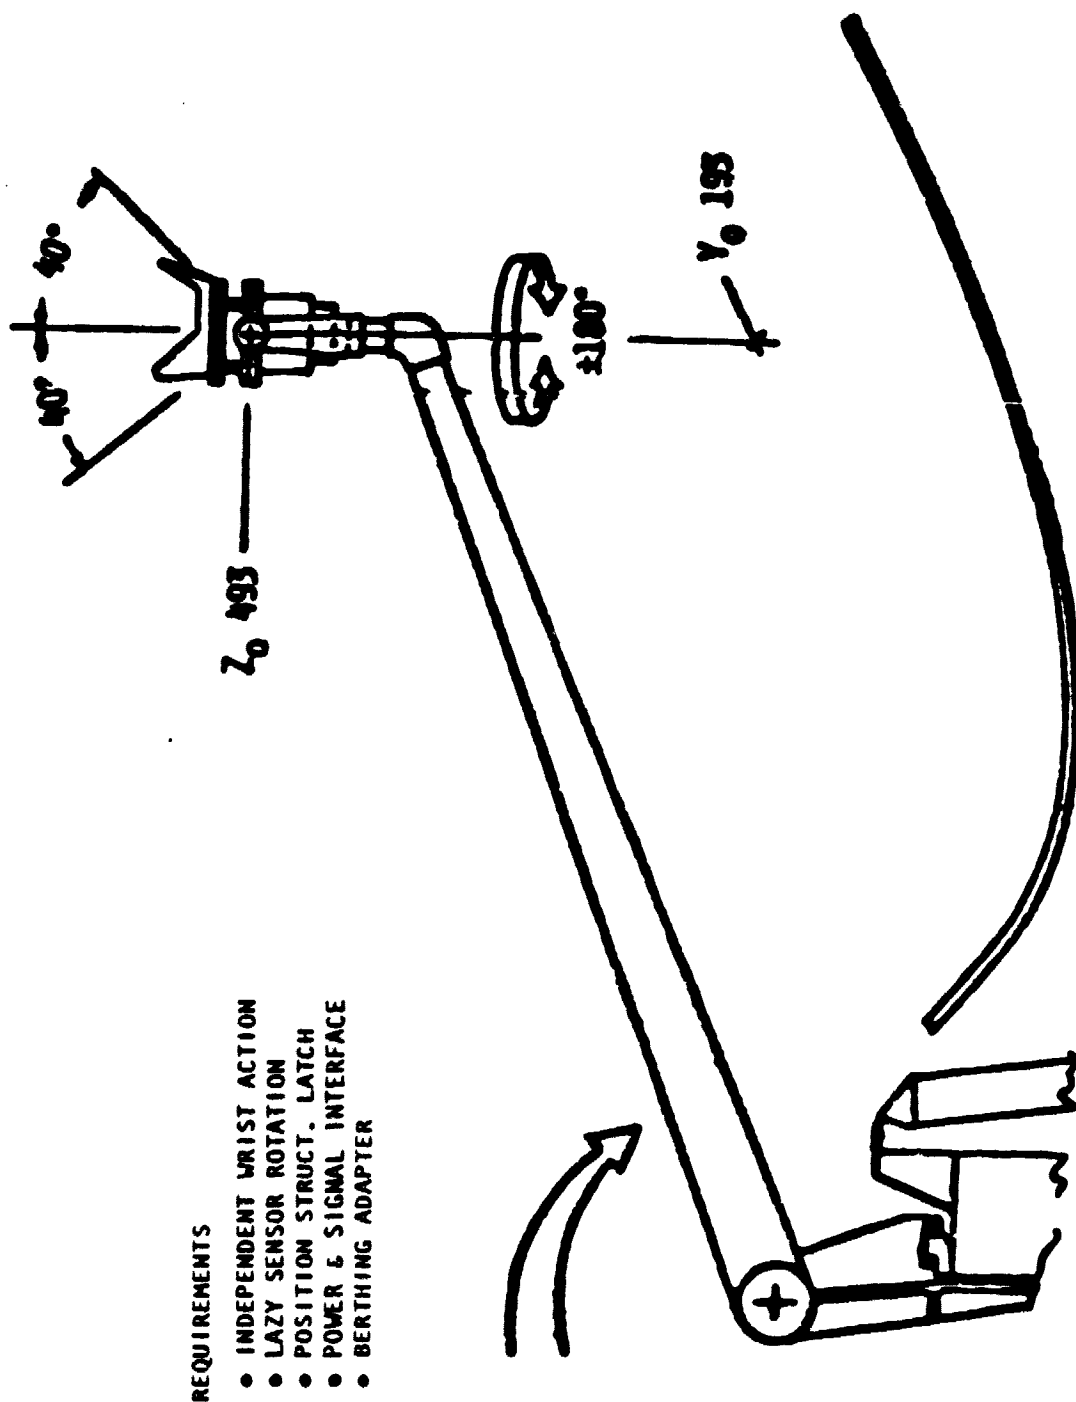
Holding and Positioning Aid -- General Arrangement
